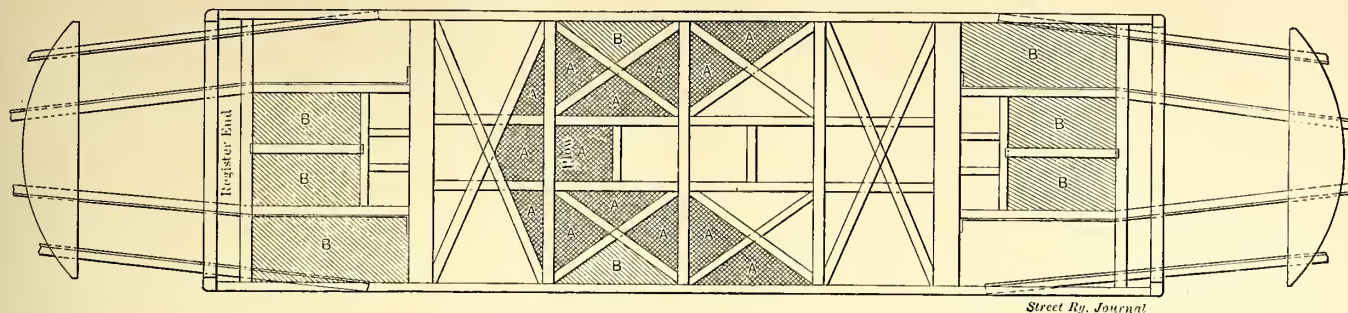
TIMBER PLAN OF WASHINGTON VESTIBULE CAR, SHOWING SPACES IN WHICH UNDERSIDE OF FLOOR IS PROTECTED WITH FIREPROOF MATERIAL
